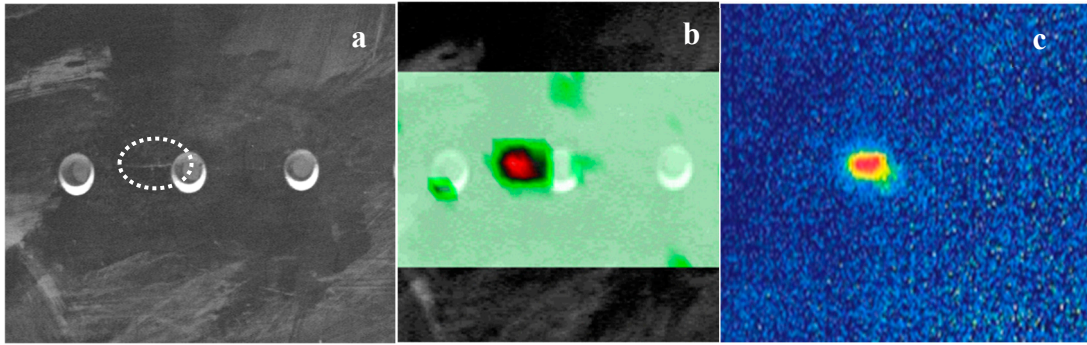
Laser vibrometry (b) and LDR thermography (c) imaging of fatigue crack between the rivet holes (dotted area in zoomed optical image (a)) in aluminum aviation component.
